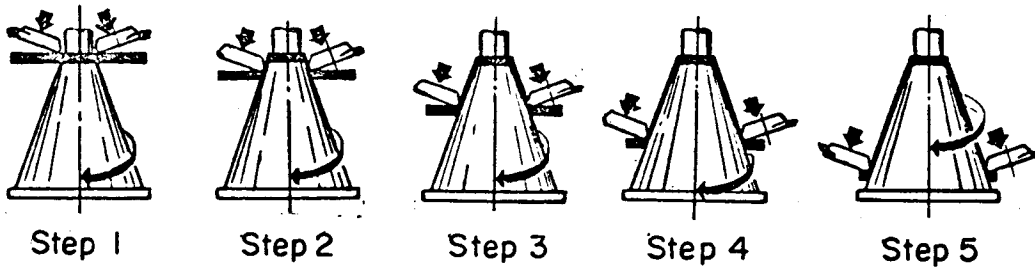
STEPS IN SHEAR FORMING A CONE (REF. 48)
